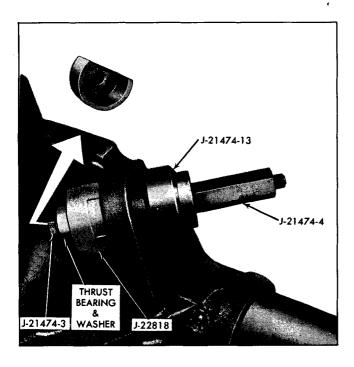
Installing Upper Control Arm Rear Bushing (Coil Spring Suspension)
